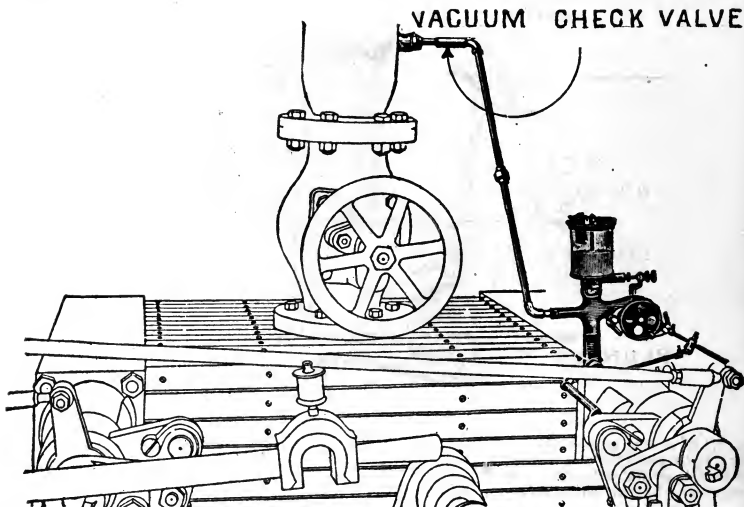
,179.—Method of attaching a power oil pump to cylinder. A vacuum check valve is placed at the end of delivery pipe to prevent the oil being siphoned out of the reservoir in case a vacuum form in the boiler or cooling. Motion for operating the plungers is obtained from some convenient part of the valve gear.
